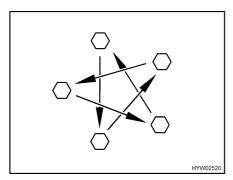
Tighten the wheel nuts or wheel bolts cross-wise
